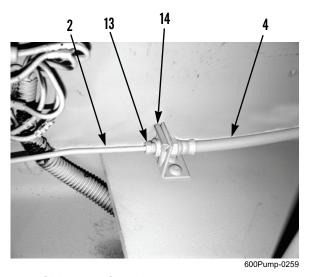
Right-Side Rear Solid Brake Line - Frame Bracket Clip.
